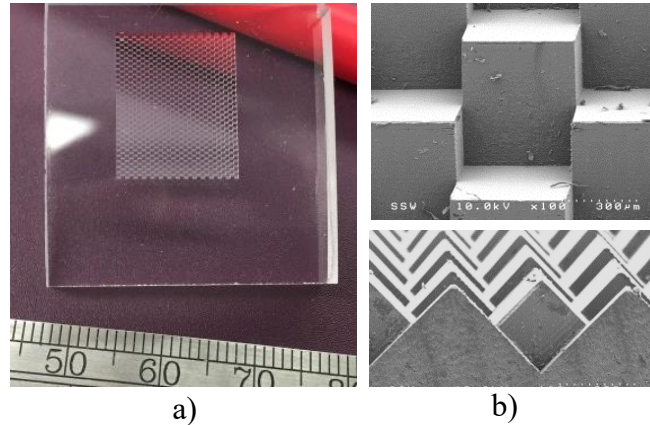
Sample workpiece: a) overview of the fabricated RTP array, and b) SEM-acquired detail views
